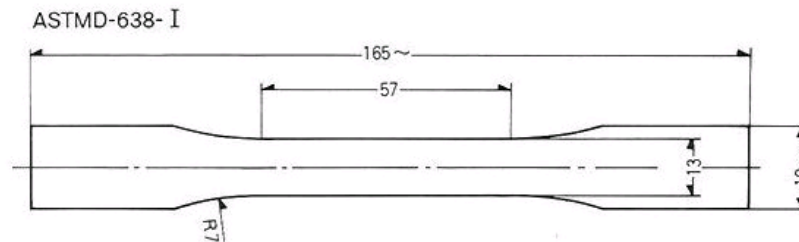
ASTM - D638 Type I dimension in millimeter [22]
